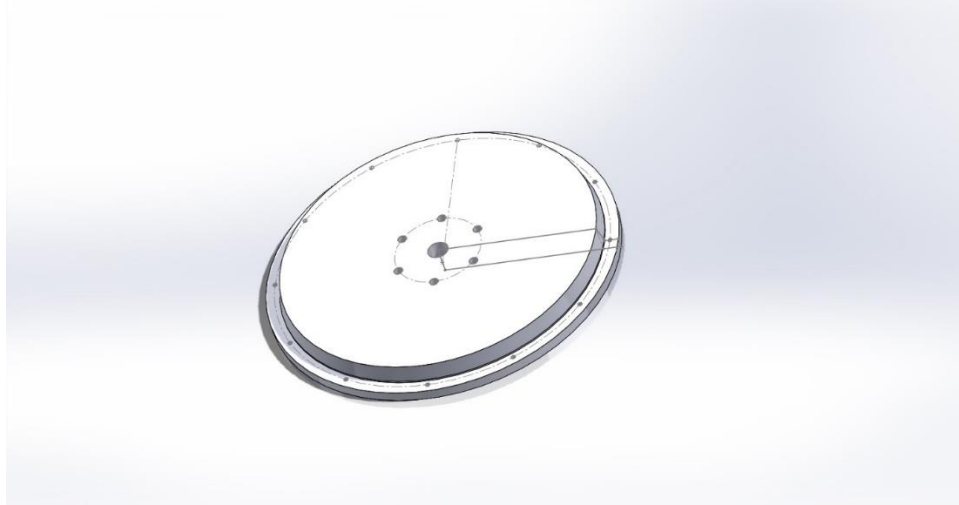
Rotary Encoder Test Fixture Primary Hub “Part”
